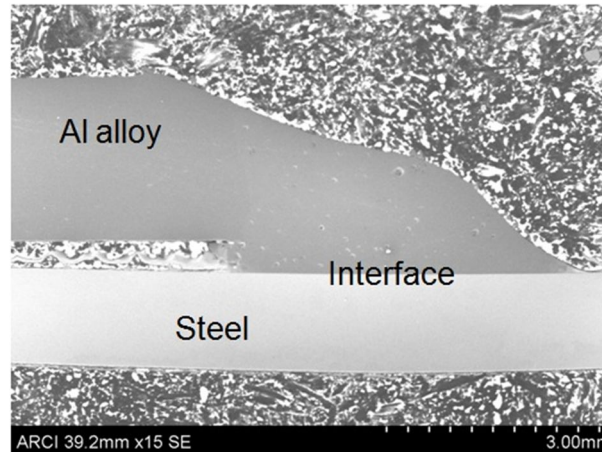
Transverse cross-section SEM macrographs of Al/steel brazed joints made with Al-12%Si filler.
